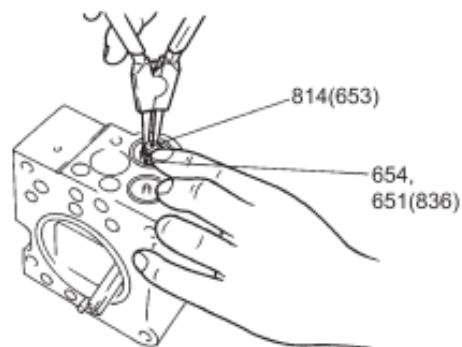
Removing spring seat (653), return spring (654) and sleeve (651)
